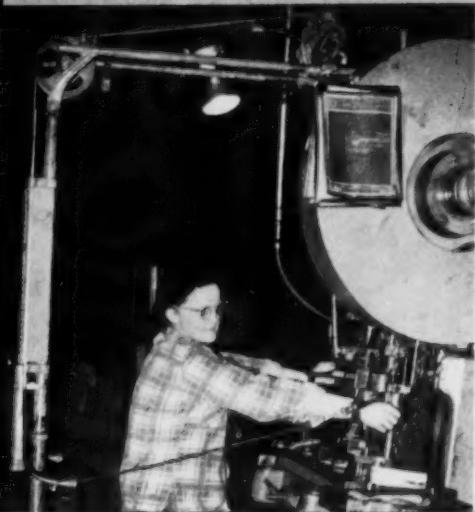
Illustration showing operator testing the pull-back guard of a punch press for correct distance to assure maximum safety.
